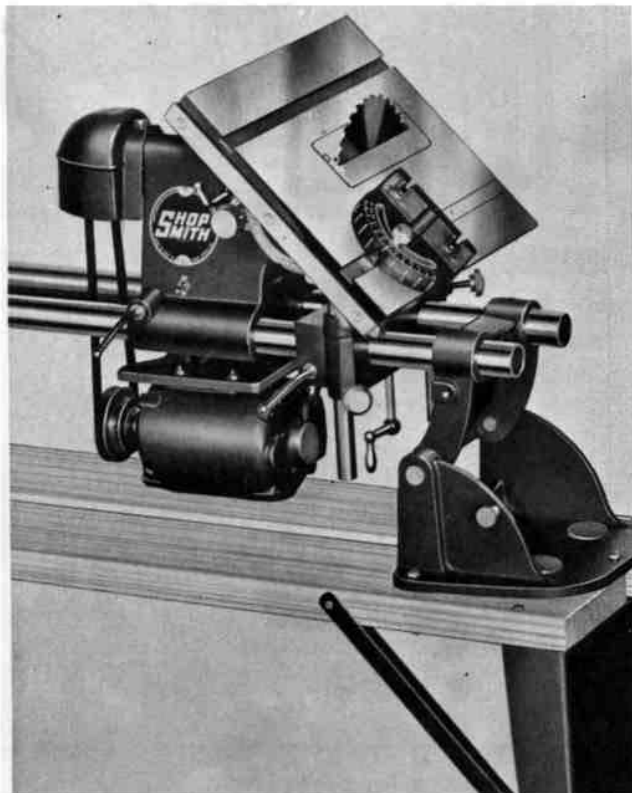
Shopsmith saw table tilted for 45° bevel cut.
